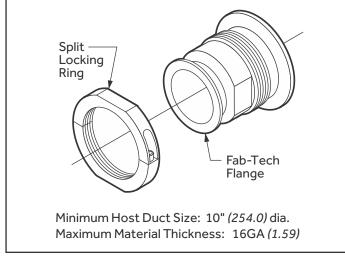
Field Installed 2" (50.8) Fab-Tech Flange
